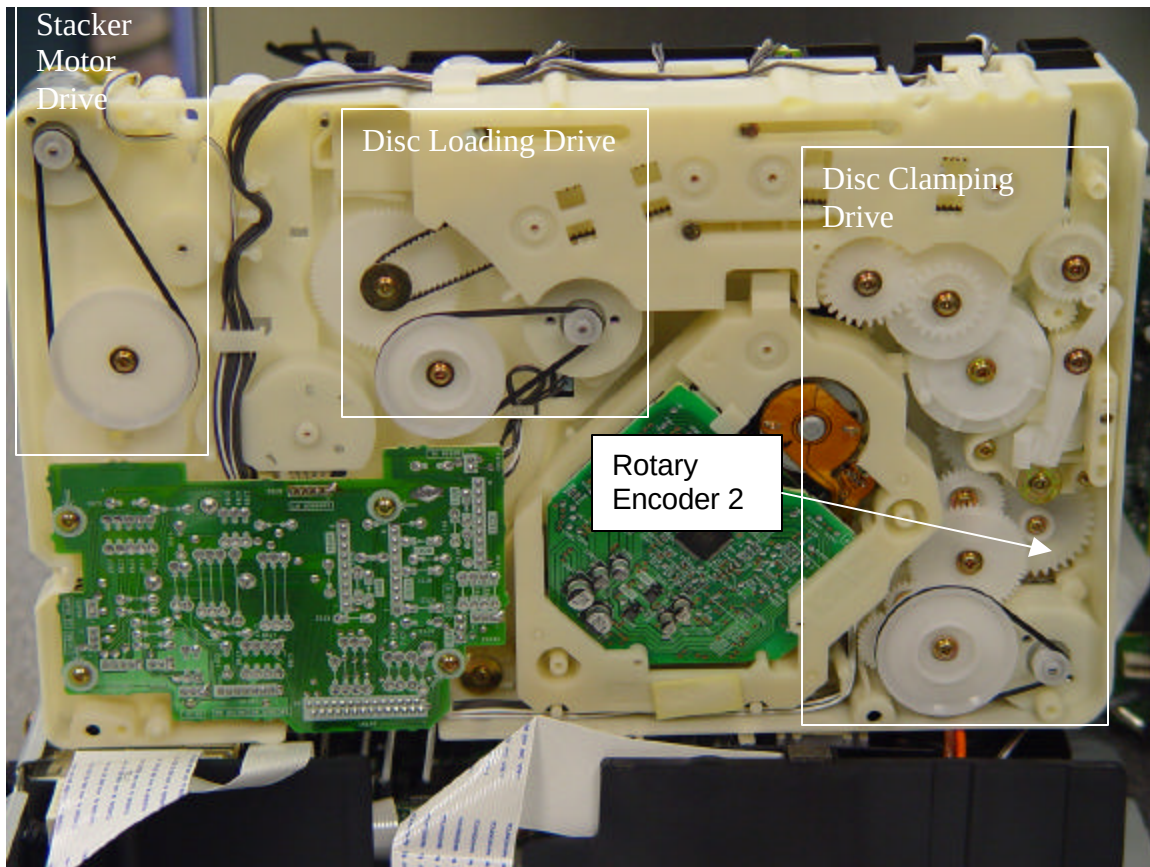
DISC MECHANISM - BOTTOM VIEW
